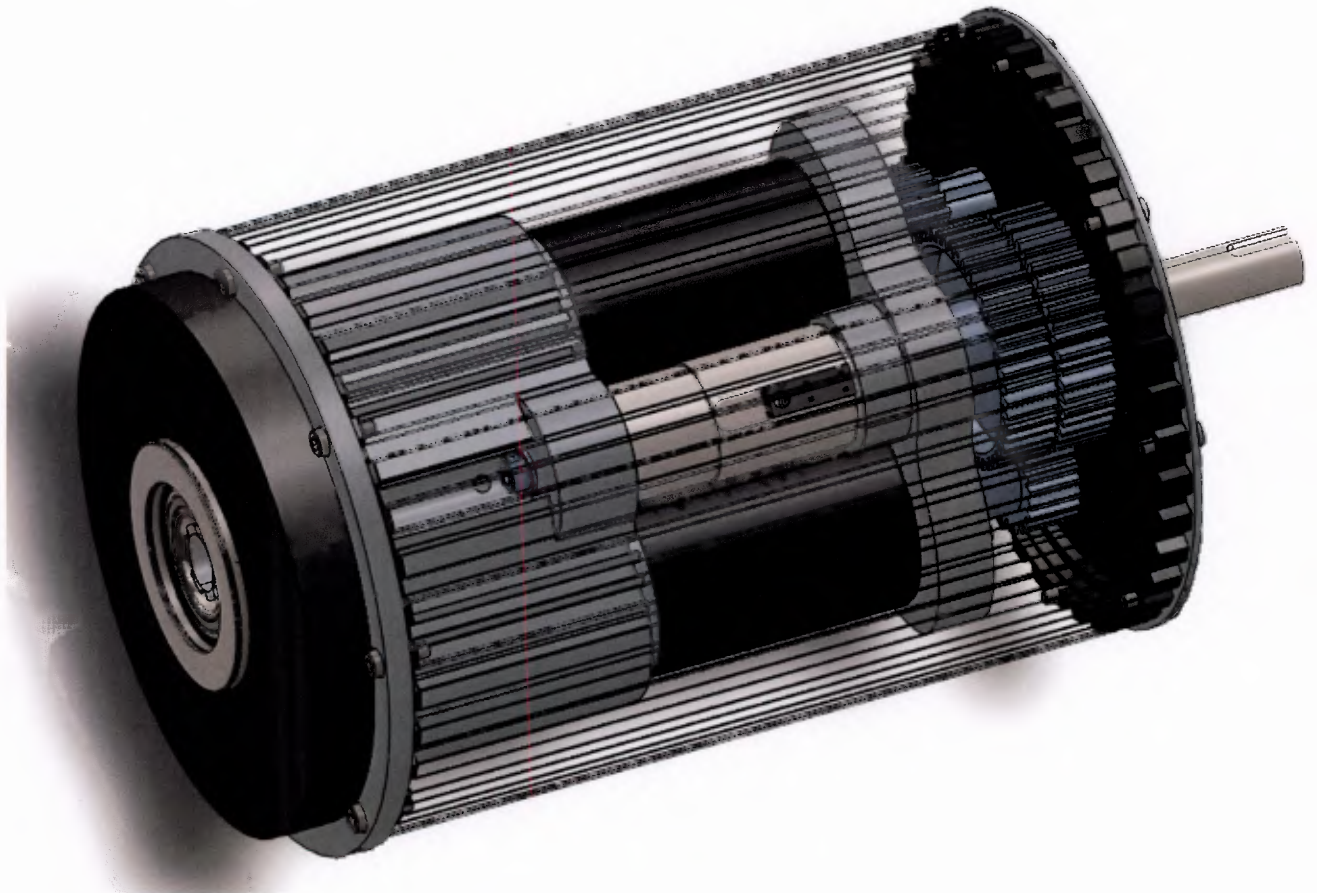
The motor assembly designed by Eugene Dreyer.
